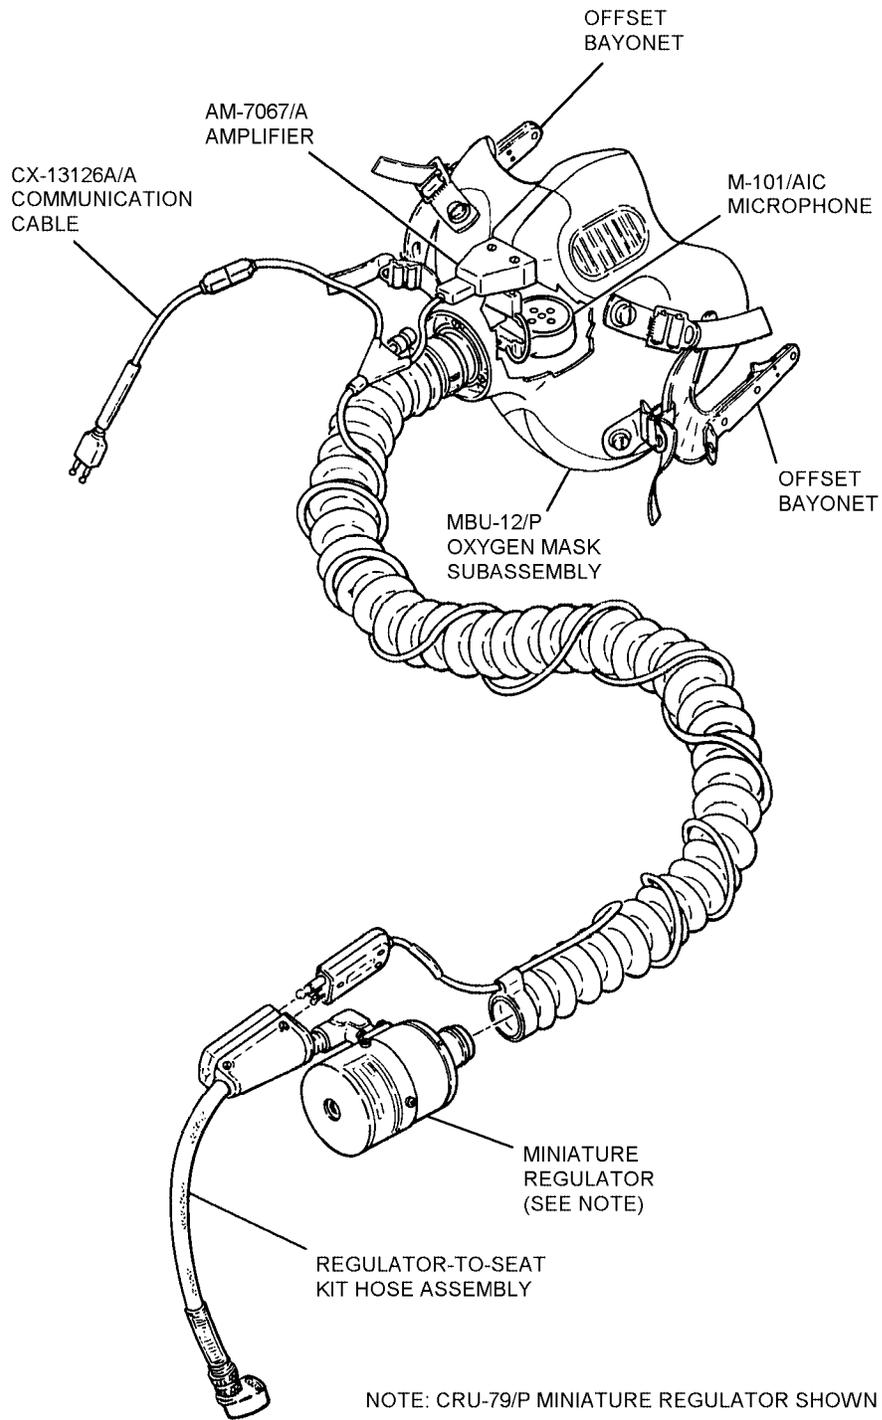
MBU-14(V)1/P Oxygen Mask Assembly
